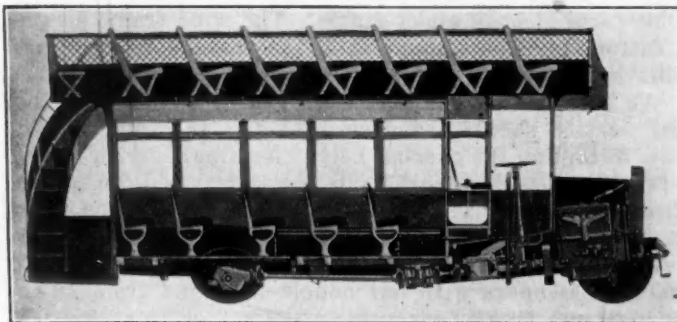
SECTIONAL VIEW OF THE TYPE-L BUS
